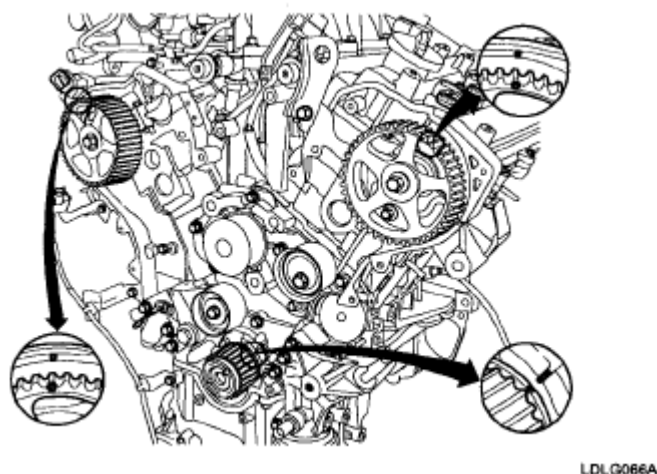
Identifying Timing Marks On Camshaft And Crankshaft Sprockets
